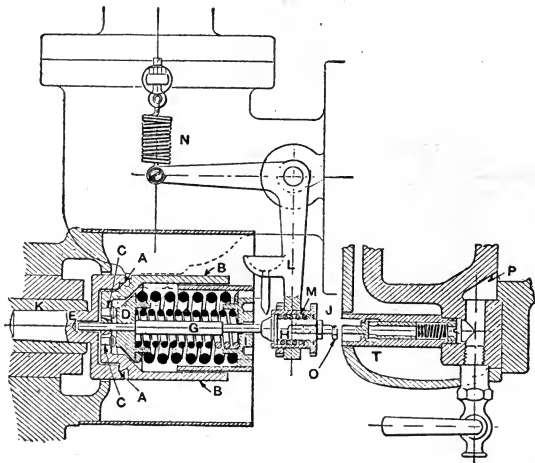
,432.—De Laval Throttling Governor. It is held in the end of one of the gear shafts by the taper plug K, and is made cylindrical in form, with its outer shell B, B, cut longitudinally into two halves which form the governor weights. These weights are fulcrumed at A, A, and have pins C, C, which press against a collar D, the latter taking the thrust of the spiral springs located within the governor. The movement of the governor is transmitted through the center spindle G, to the bell crank lever L, which is balanced by a spiral spring N. The shaft supporting this lever passes through the valve casting, on the inside of which are a pair of arms connecting with a double seated throttle valve as shown. A connection between the center spindle G, of the governor and the bell crank lever L, is a flexible connection, and that at the right, is a valve T, which connects through the passage P, with the wheel casing. If the speed become excessive, pin O, would strike spindle T, which would admit air to the wheel compartment and thus reduce the speed.
